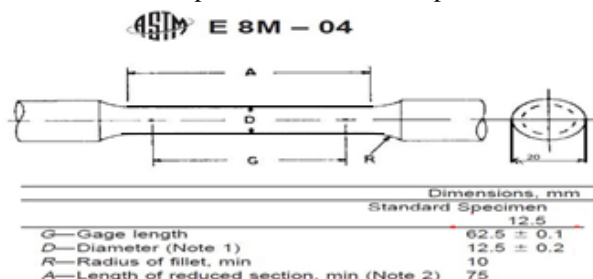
dimensions of specimen as per ASTM E8M standard [10]
